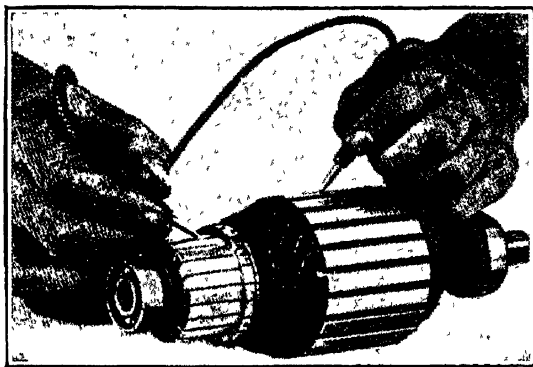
Testing armature with 110-volt test lamp for grounded winding
